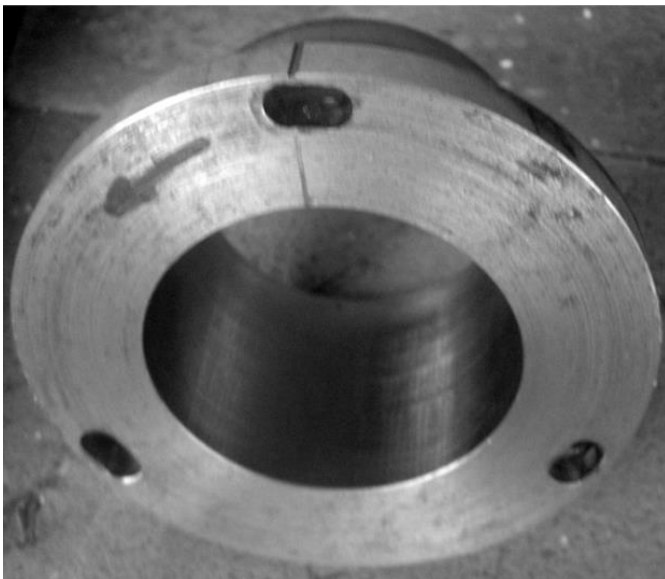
Bushing to be placed inside the shaft seating arrangement
